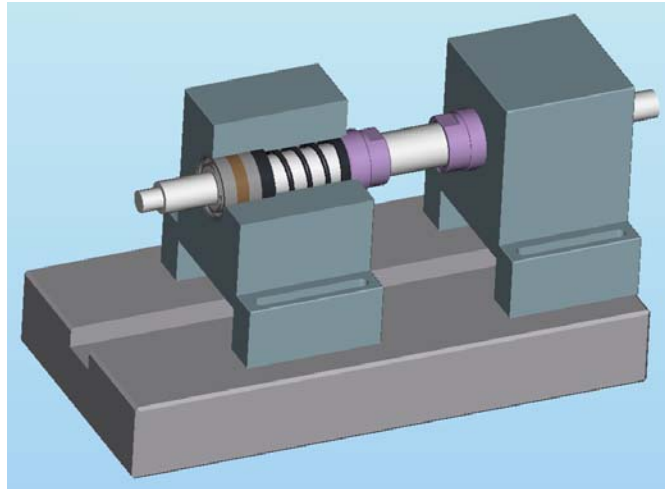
CAD drawing of the experimental set-up showing inside details.
